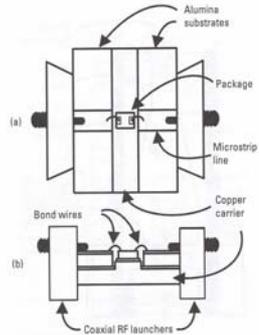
(a) Top and (b) side views of the carrier assembly and coaxial RF launchers. The package can be grounded by bonding to the center of the carrier.
